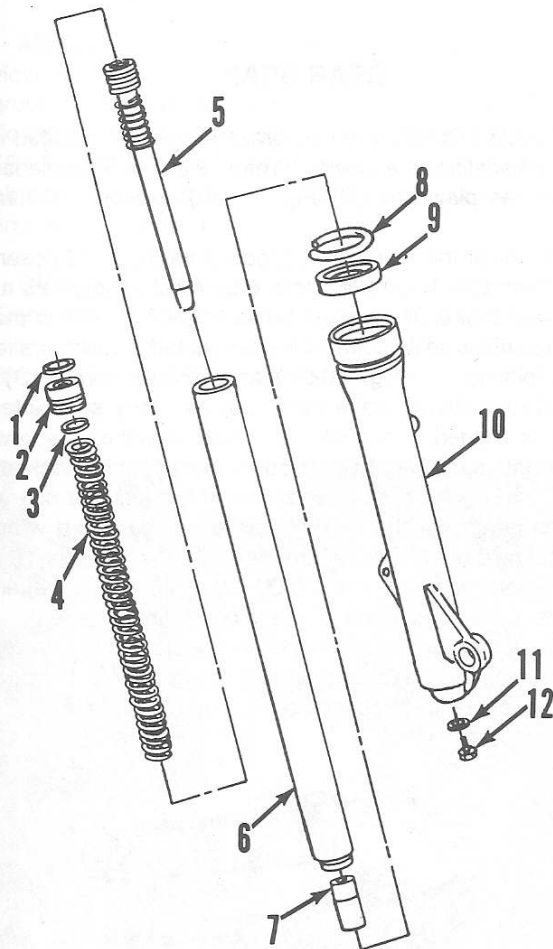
Exploded view of front fork assembly used on 225 cc models.
